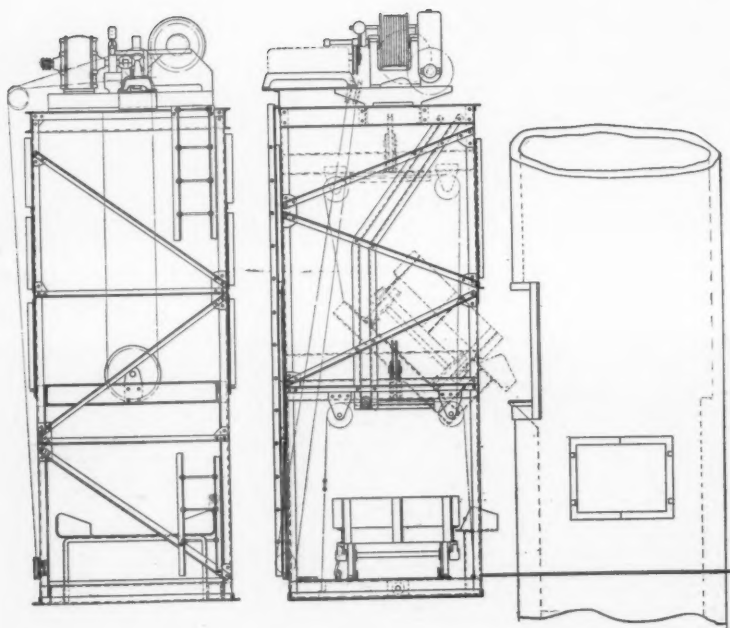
FIG. II.—ELECTRIC COMPOUND CHARGING MACHINE.
